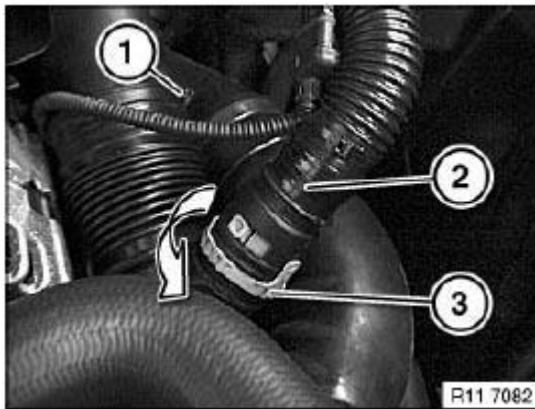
Releasing Quick-Connect Fastener On Boost Pressure Pipe
